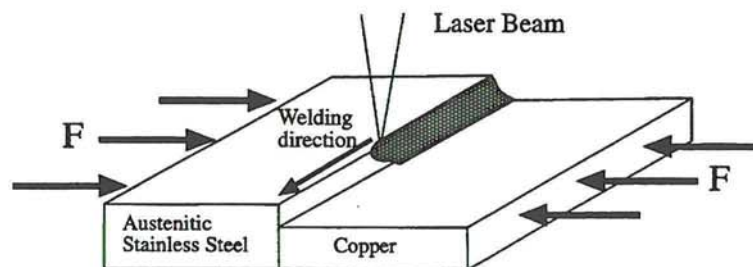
Schematic of the experimental set-up when welding plates. Note that the laser irradiates only the stainless steel side of the interface.
